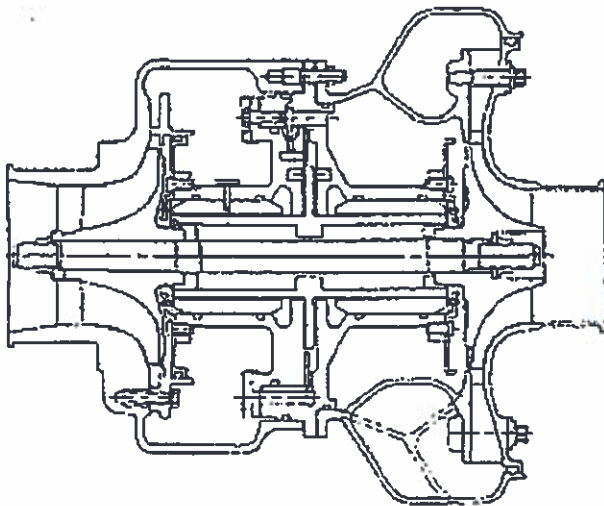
B-1B Foil Bearing Air Cycle Machine
